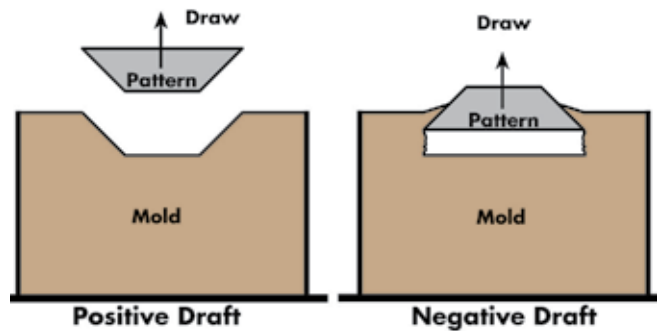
Shown (from l) is proper, positive draft and incorrect, negative draft. Draft refers to the taper of the pattern, which allows it to be extended from a compacted sand mold.
